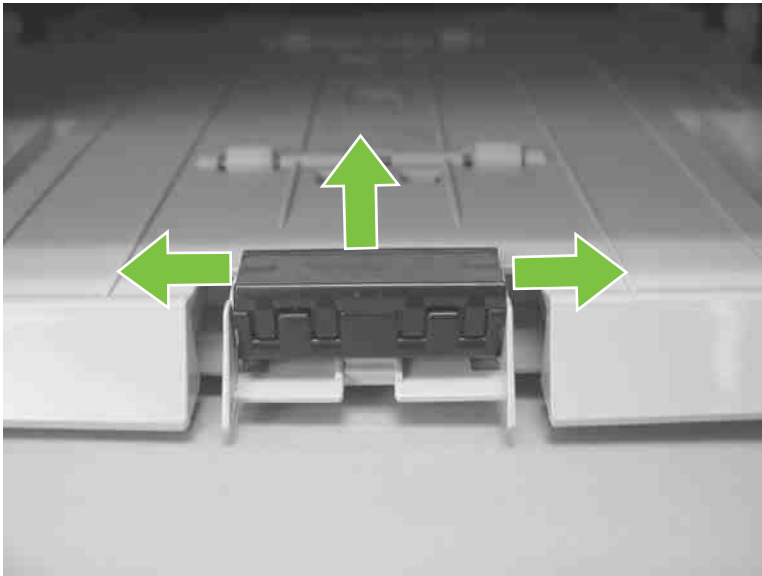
Remove the Tray 1 separation pad (1 of 2)
